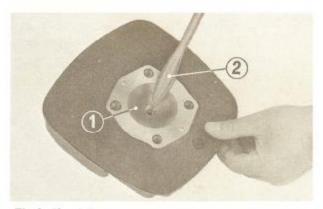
(1) Cylinder head combustion chamber (2) Scraper
